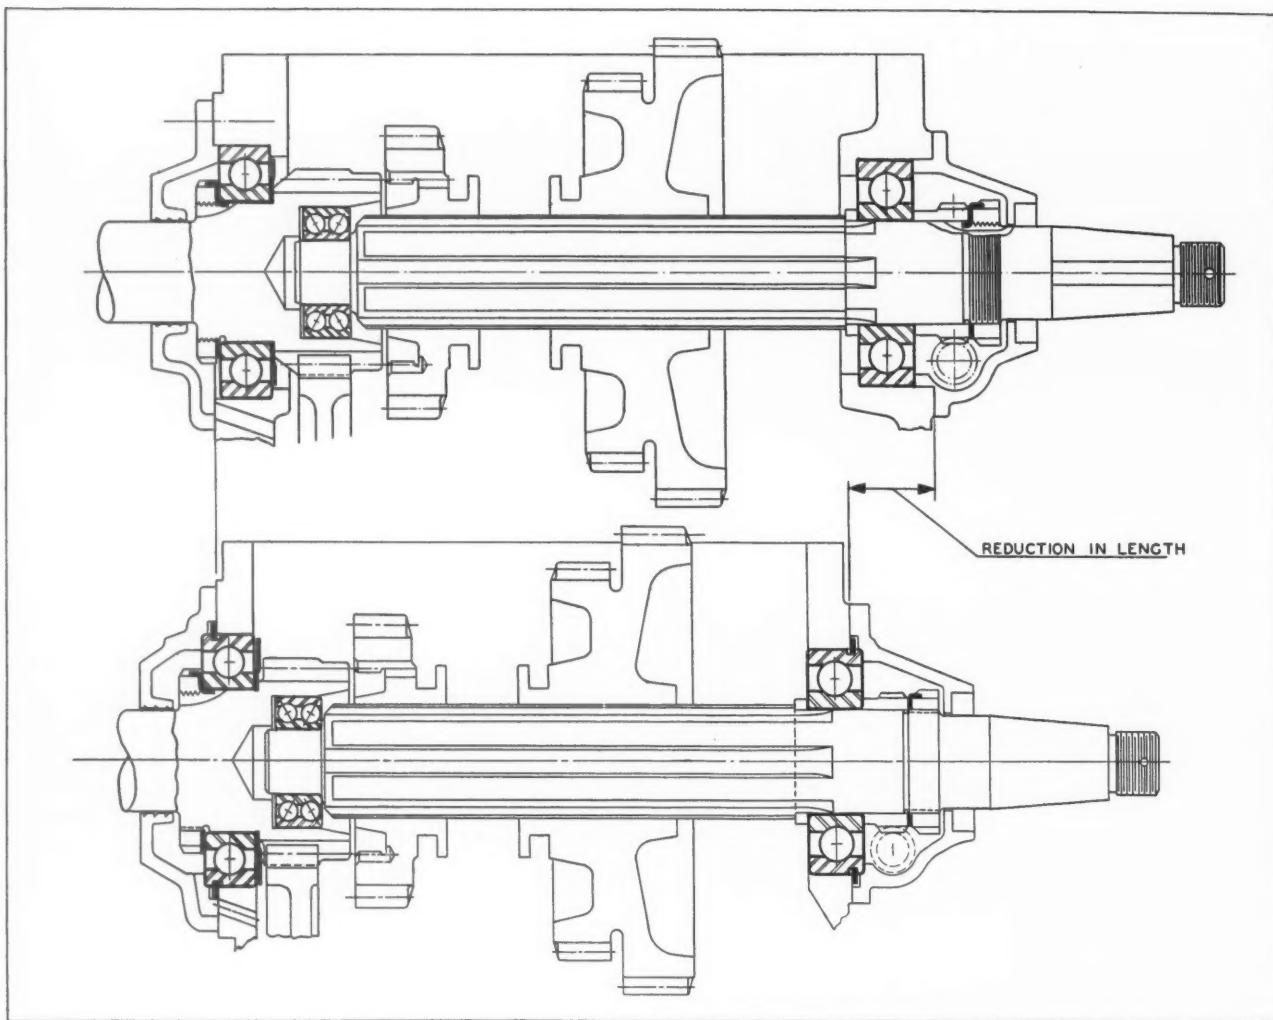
Diagrams Illustrating How G Type Bearings Simplify the Machining of Automobile Transmission Cases and Enable a Reduction to be Made in Their Length
